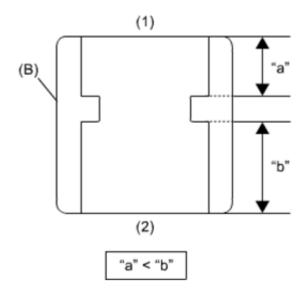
Identifying Intake And Exhaust Valve Guide Dimension Courtesy of SUZUKI OF AMERICA CORP.
